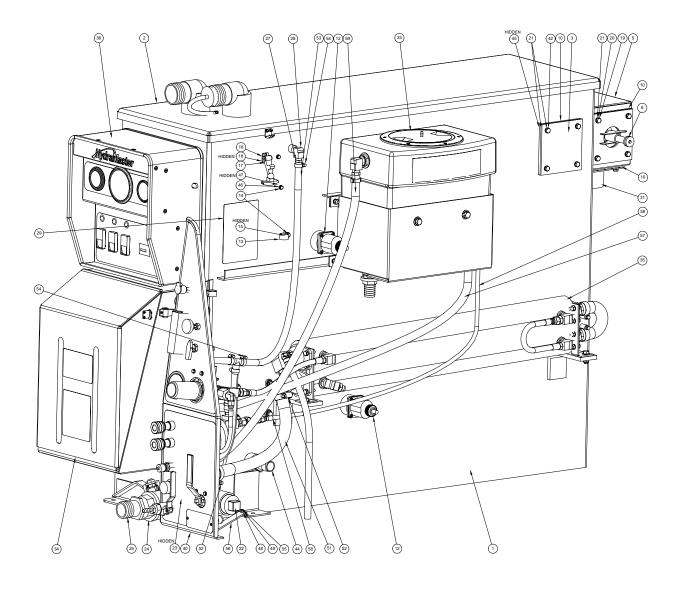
CDS 4.8 Recovery Tank Assembly - Front View D-6977 Rev -
